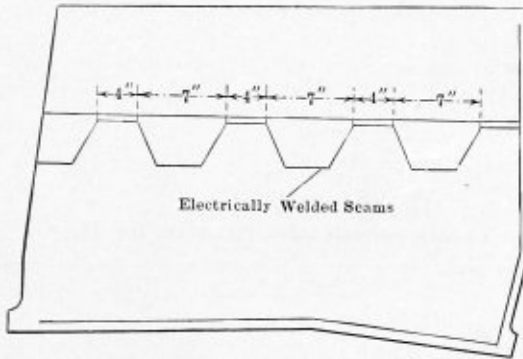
Method of Welding Side Sheets and Patches by Electricity, Using Staggered Seams
